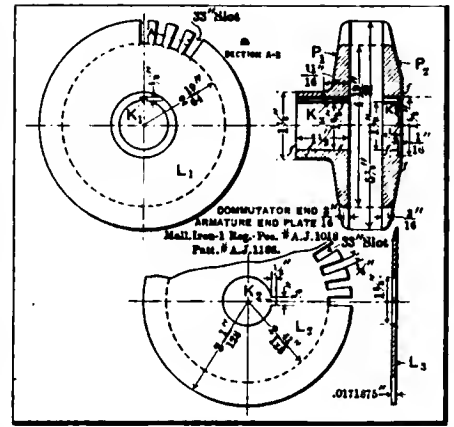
Armature laminæ, showing plan of slotting, thicknesses of laminæ, method of securing, and details
